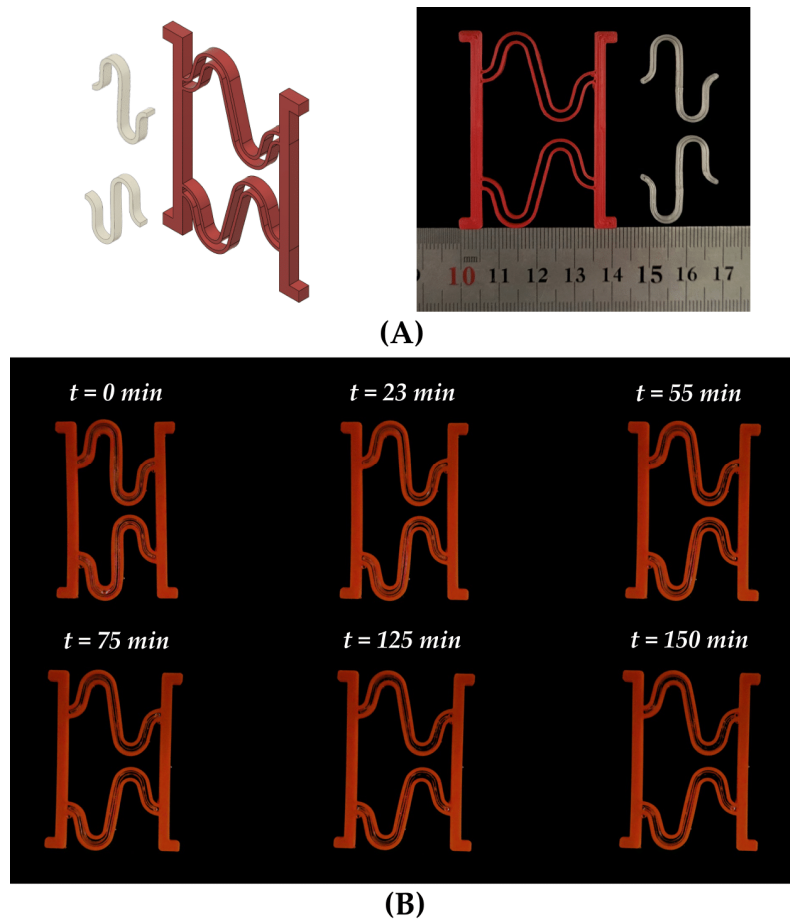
(A) CAD models & prototypes and (B) shape-morphing test for actuator 36.
